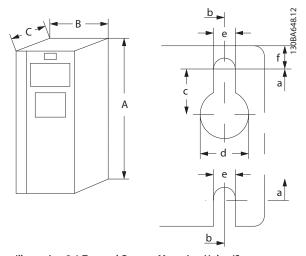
Top and Bottom Mounting Holes (See chapter 8.9 Power Ratings, Weight, and Dimensions)
